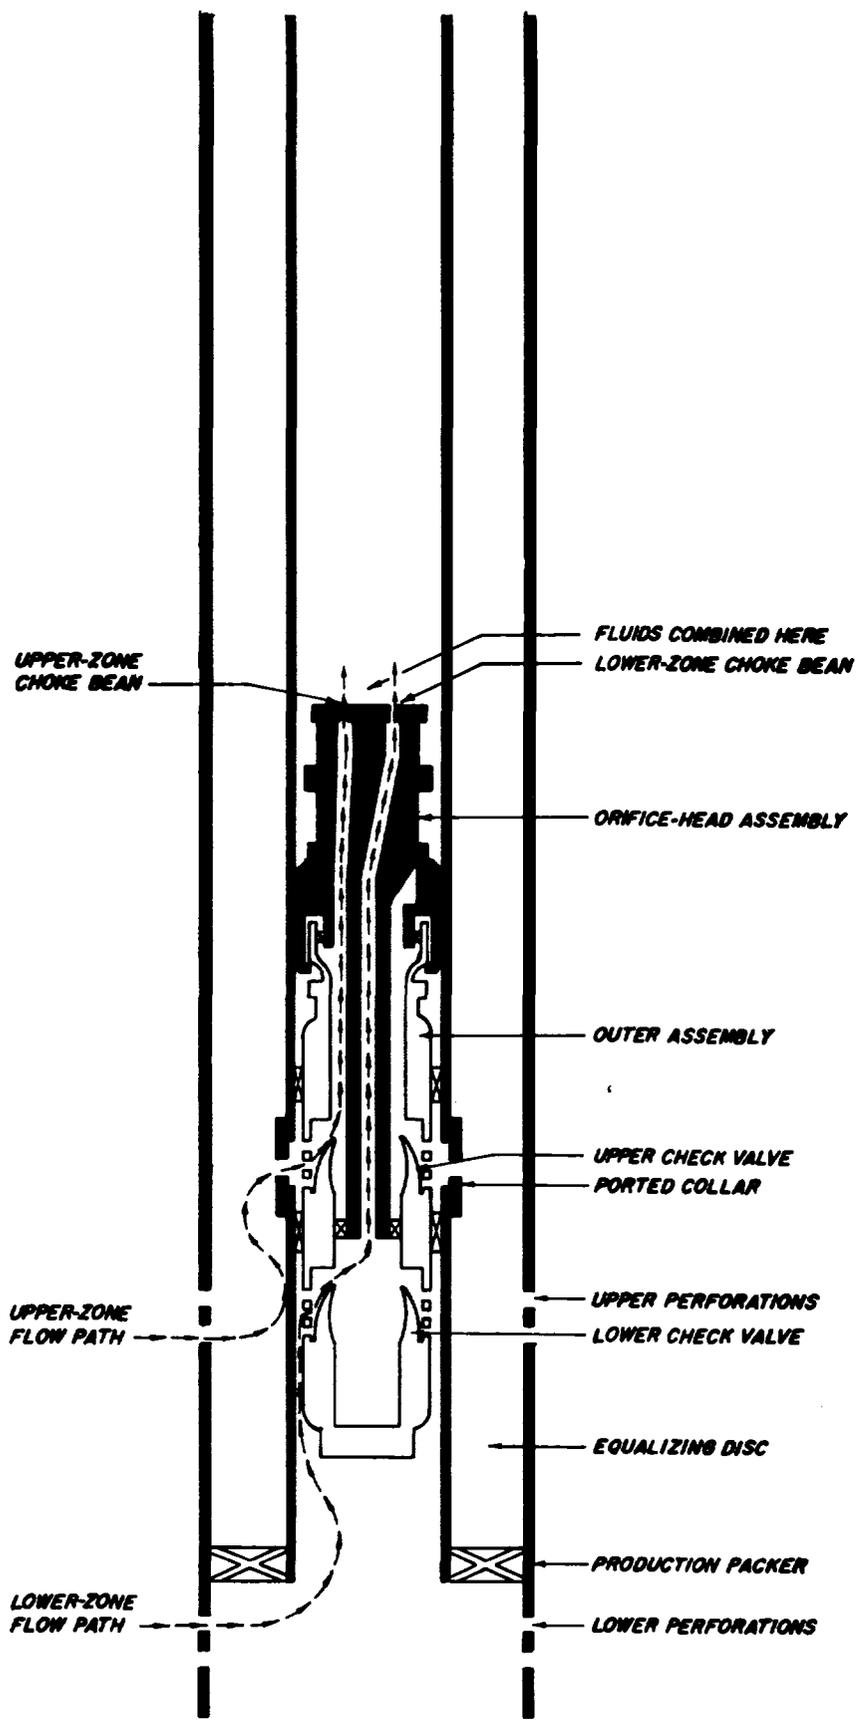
Schematic Drawing Showing Operation of Multiple Completion Choke Assembly
